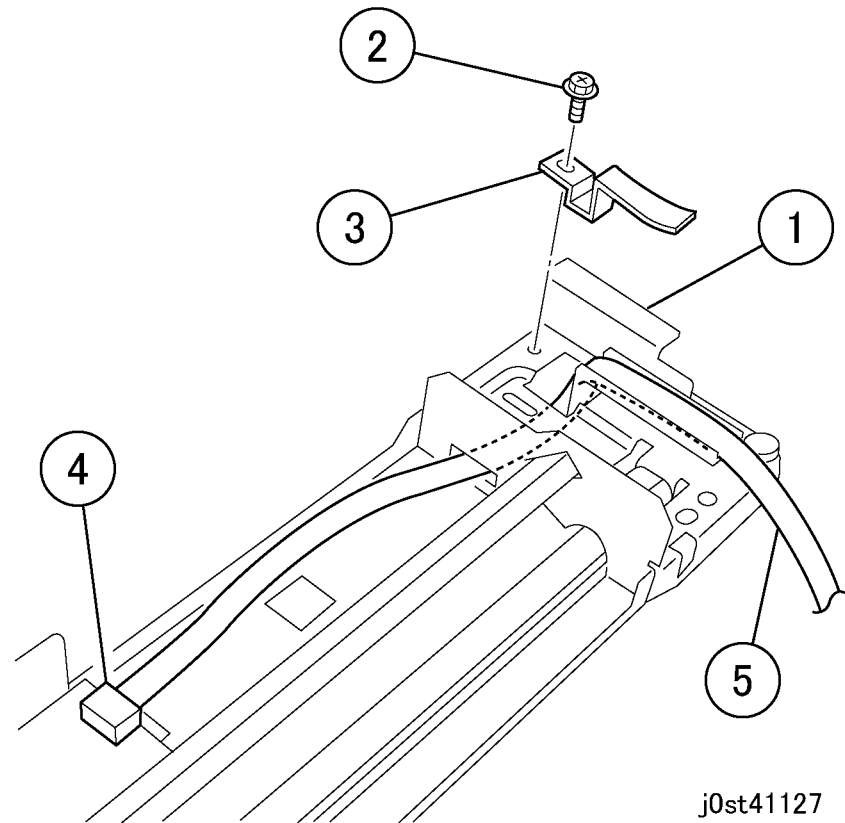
Removing the Lamp Wire Harness (j0st41127)
